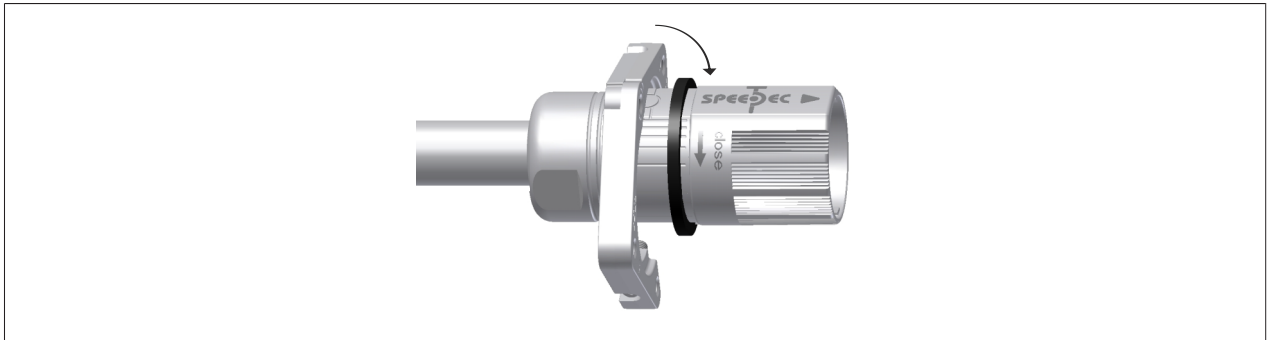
Attaching the metal flange to the connector (rear panel installation)
